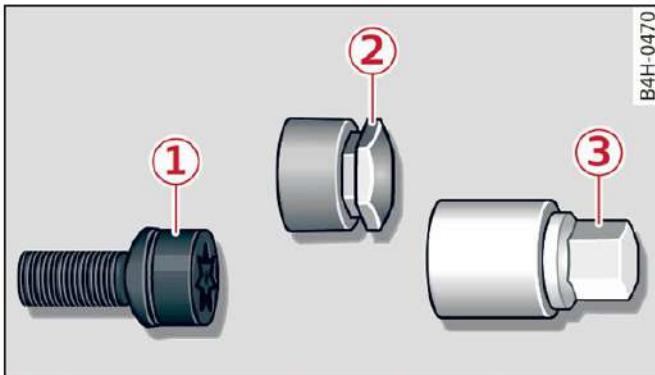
Anti-theft wheel bolt with wheel bolt cap and adapter
